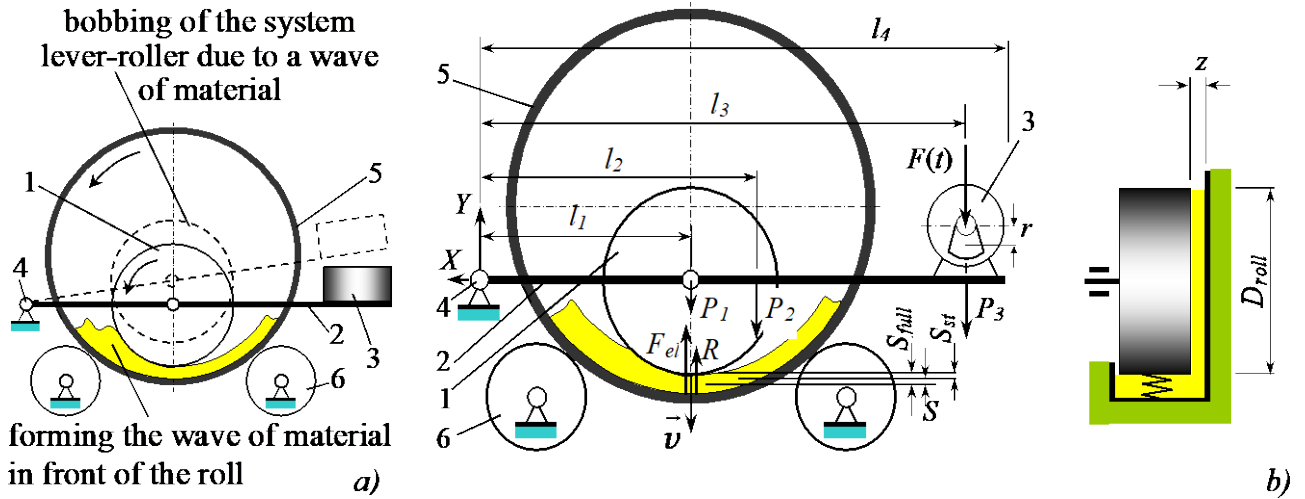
Scheme of drum-roll machine: a) forming the wave of material in front of the roll; b) construction with forced vibration of the "lever-roller"
